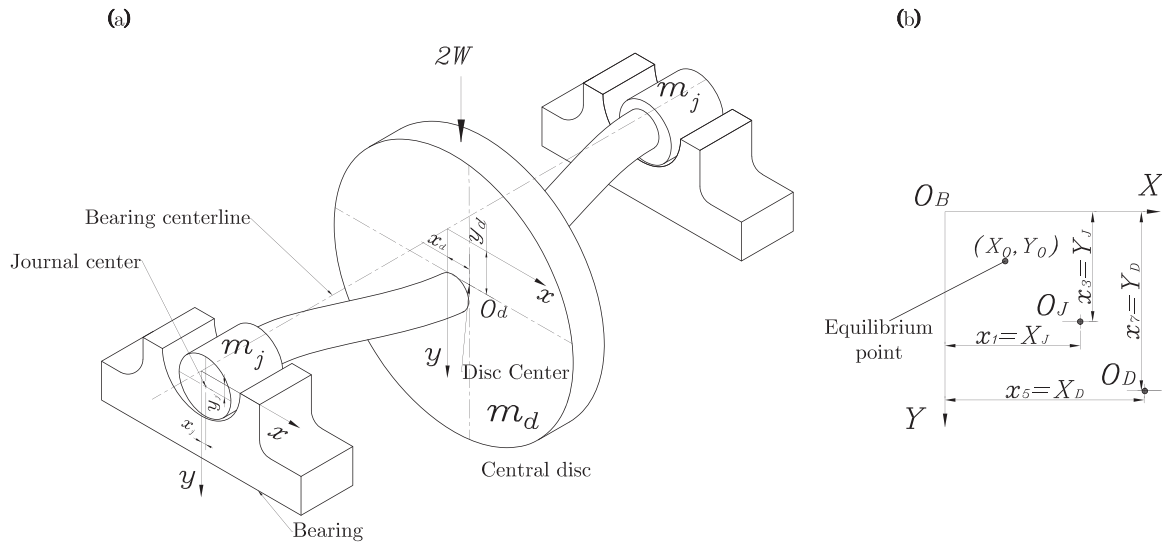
(a) Elastic rotor supported on two symmetric journal bearings. (b) Dimensionless bearing coordinates.
